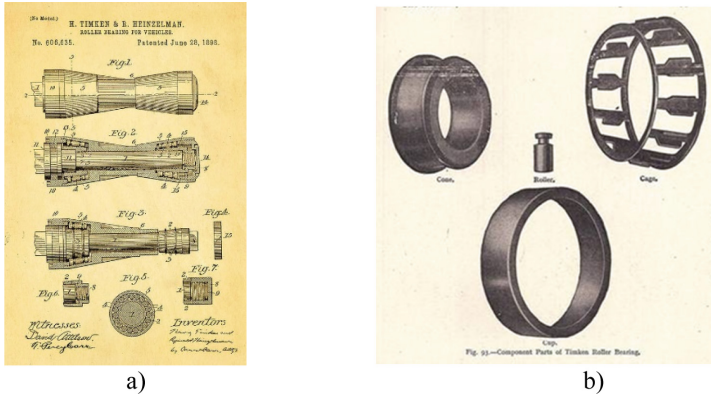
a Original drawing of the first patent of a tapered roller bearing, no. 606,635, from year 1898 [8] and b a drawing of a Timken tapered roller bearing (with cut rollers) [7].
